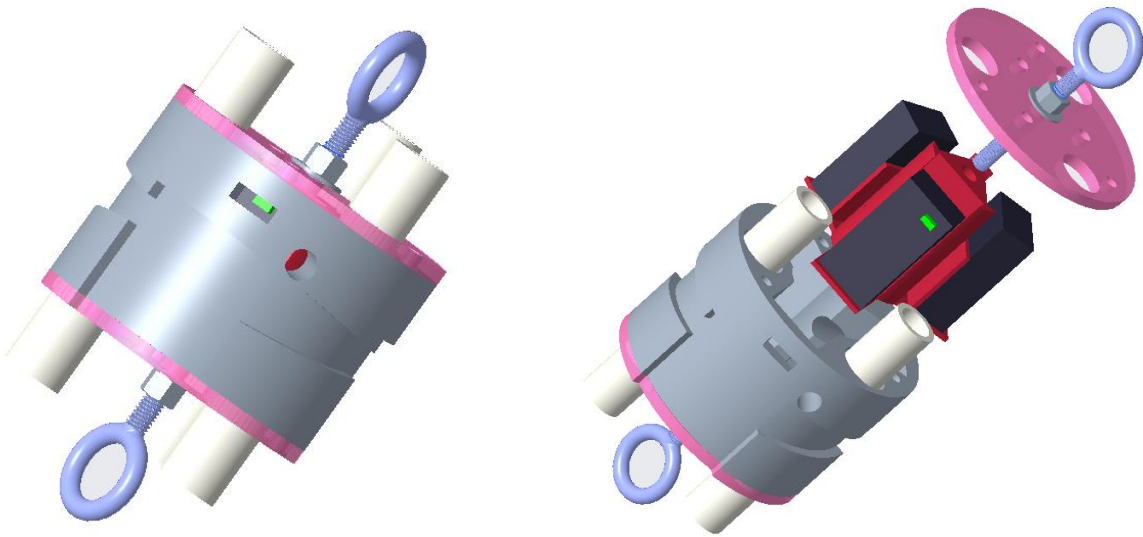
CRAM v4 assembled view (left) and exploded view (right).
